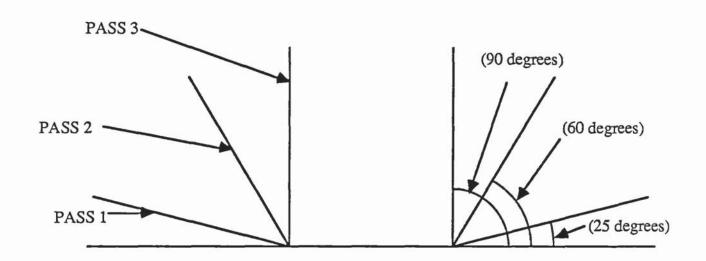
FLOWER OF SPECIMENS FOR MACHINE TRIALS
